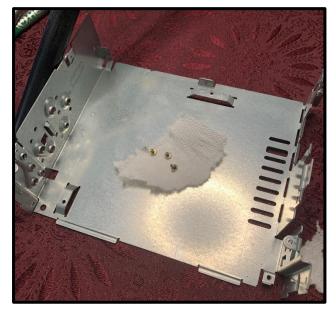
Exterior wall on the top opposite to the motherboard's wall, with three connecting screws
